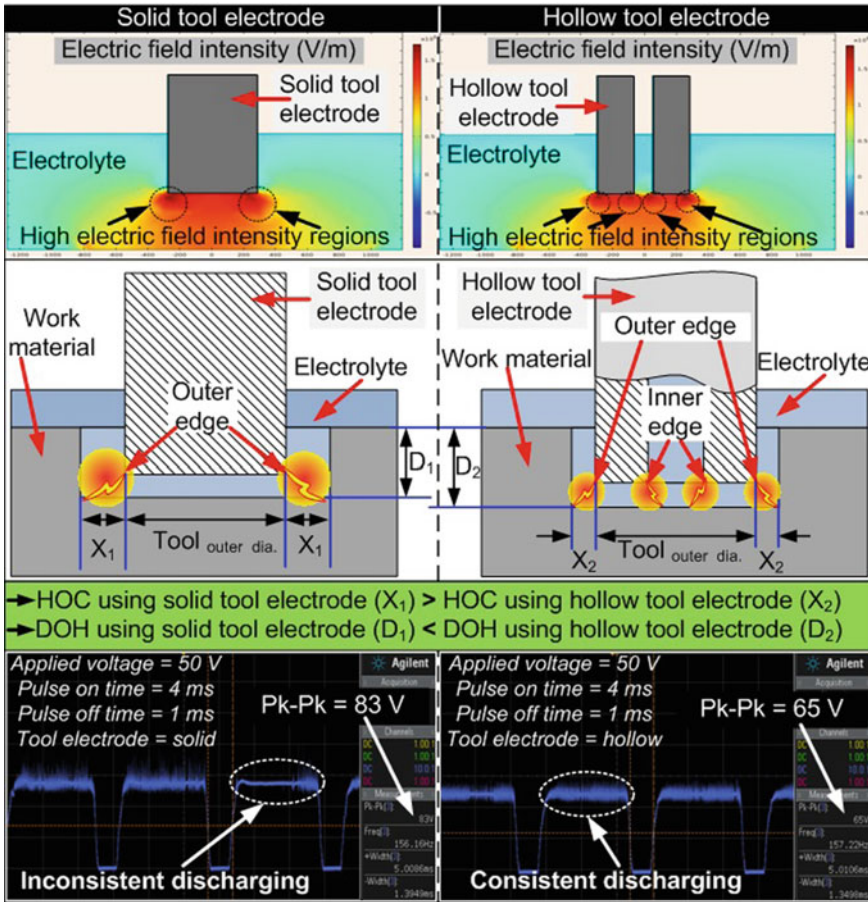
Mechanism of material removal using solid and hollow tool electrode
